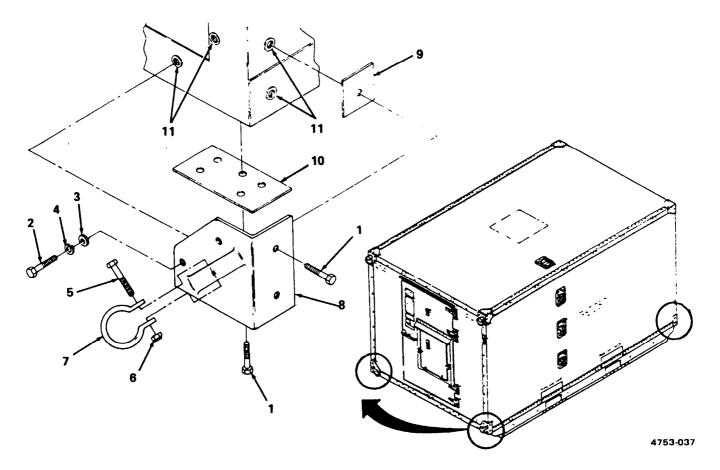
Towing Eye Assembly Repair and Replacement.
